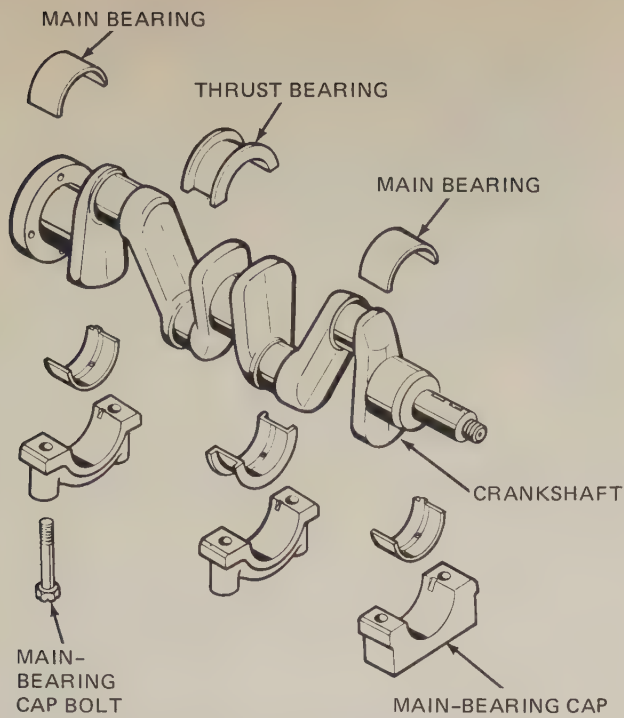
A one-piece crankshaft for an in-line four-cylinder four-cycle engine. (The J. I. Case Company)
